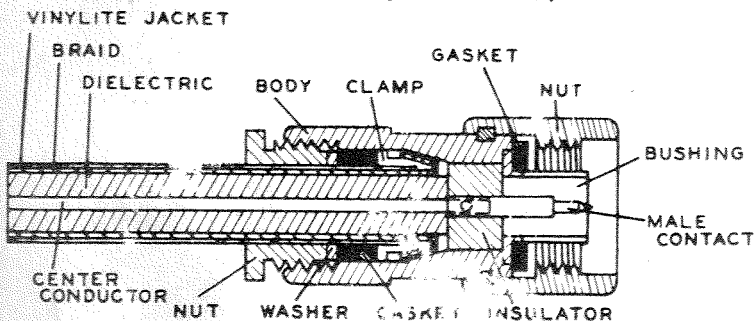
Assembling Plug UG-21B/U to Cable RG-8/U
